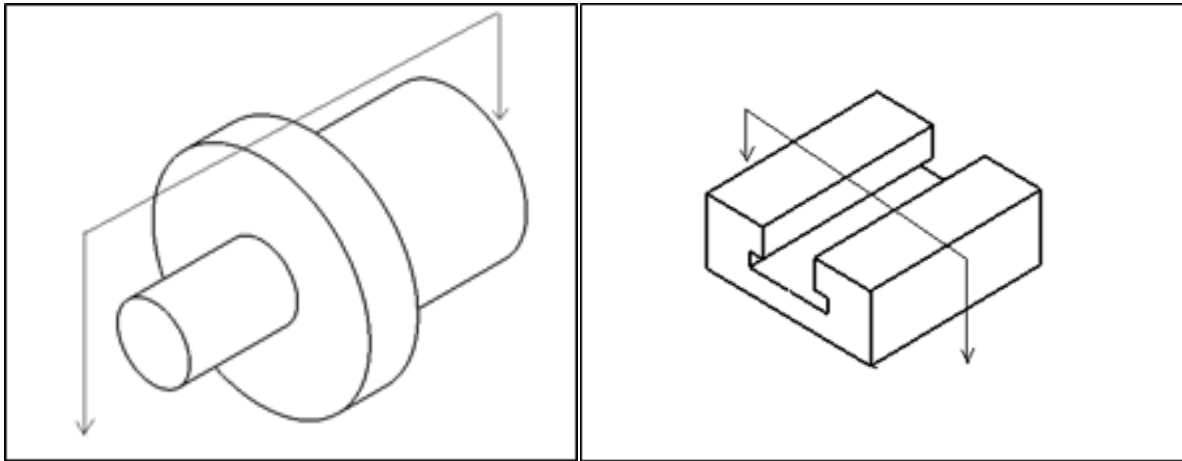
An example of a 3D drawing of a Shaft and a Tee Slide
